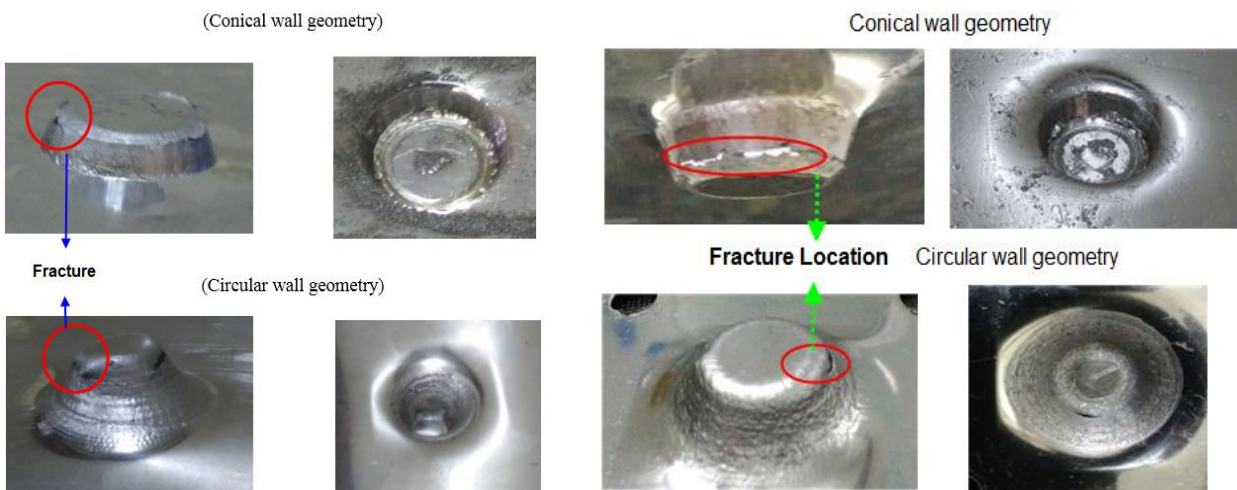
Components fabricated by ISF: a) by electromagnetic fixture b) and by conventional fixture
